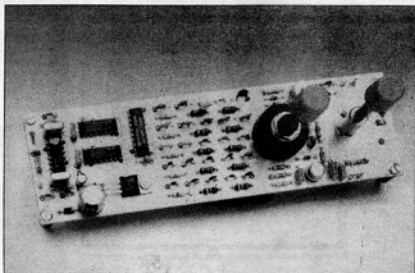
Completed PCB before installation in the enclosure. Note that a dual-pointer knob is fitted on the spindle of the tuning capacitor.
